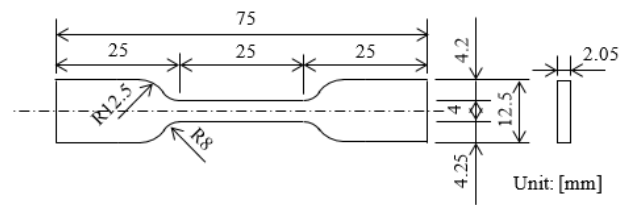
Shape and dimensions of an adhesive bulk specimen for tensile tests[14].
